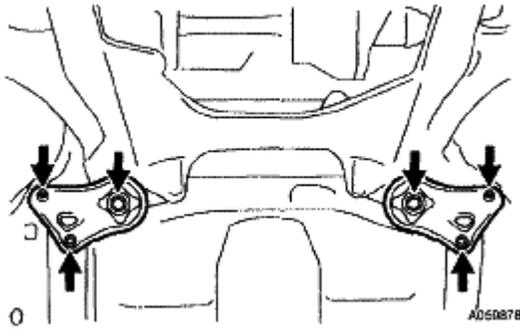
Locating Bolts, Nuts And Front Suspension Member Brace Rear RH And LH
